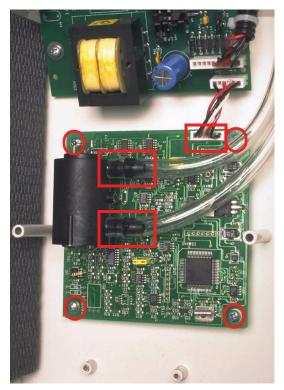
FIGURE U: CONNECTIONS AND MOUNTING SCREW LOCATIONS
